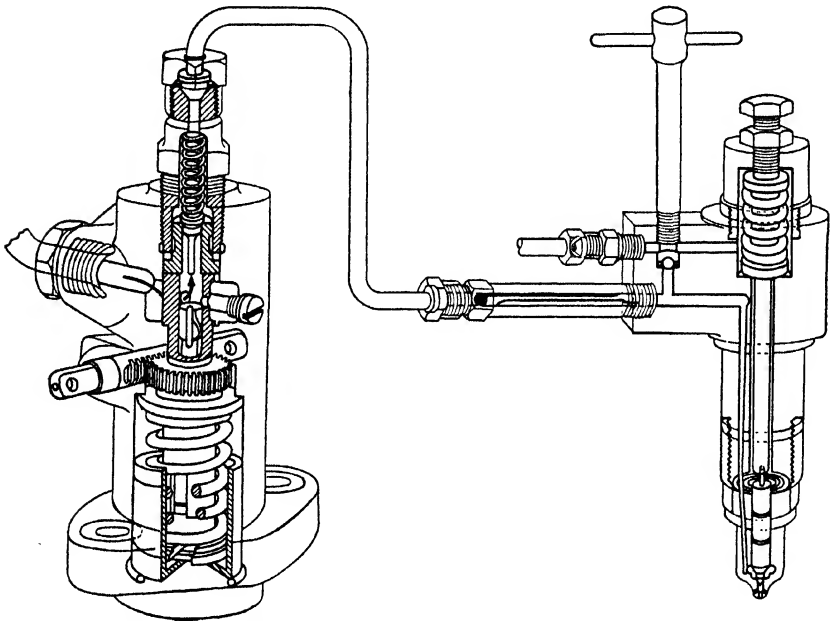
Essential parts of Bosch fuel-injection system, multiple-hole nozzle.
